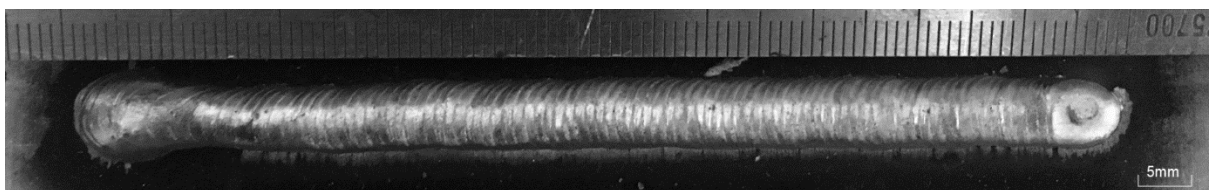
The welding layer with 6.5m/min of feeding wire speed
